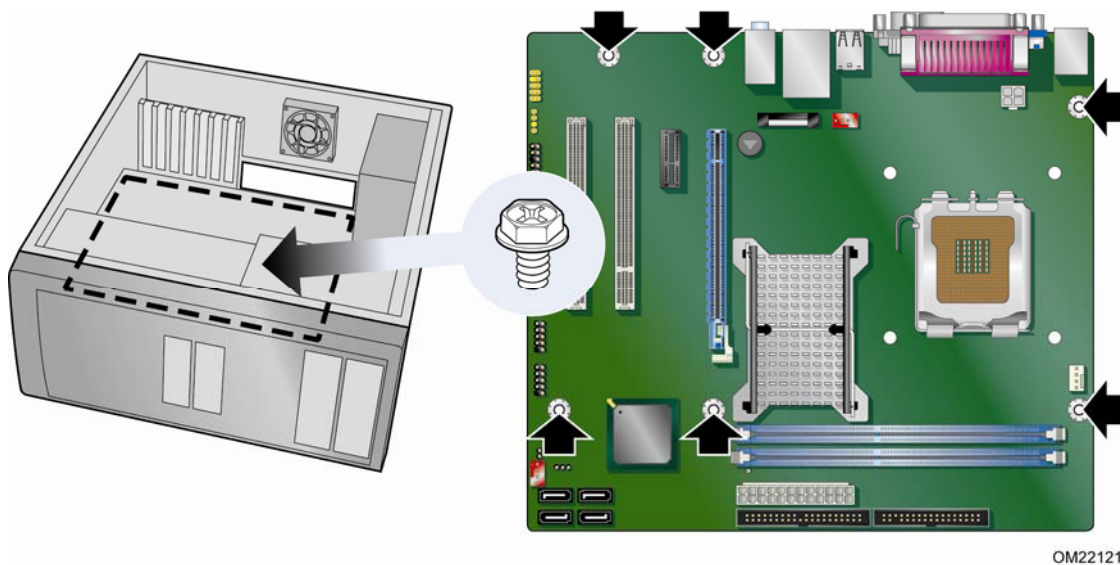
Intel Desktop Board DG41TX Mounting Screw Hole Locations
